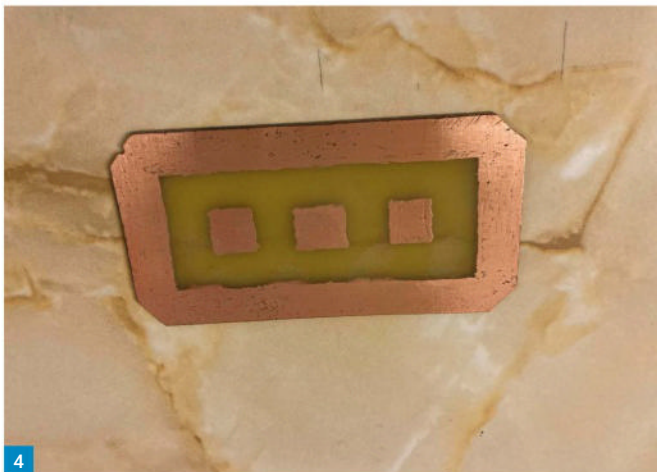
Block layout. Fig. 5: Circuit board pre-fitted into box. Fig. 6: The final assembly.
